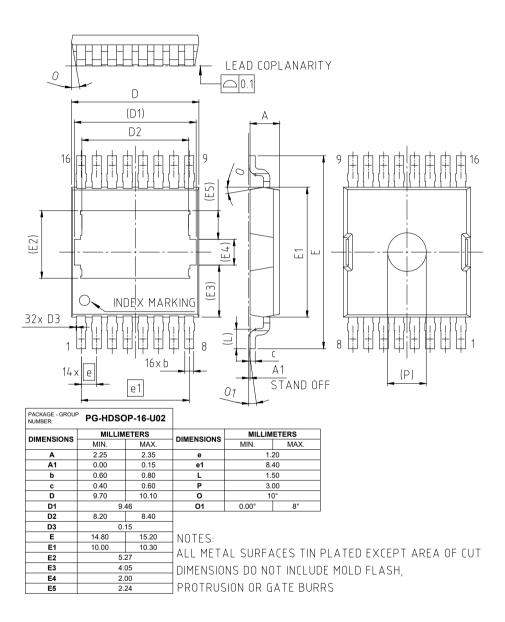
Outline PG-HDSOP-16, dimensions in mm
